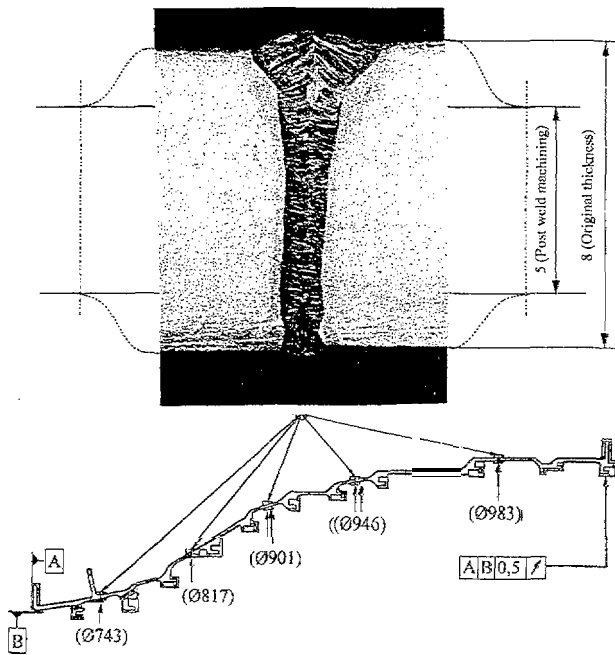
Cross section of assembled rings and circumferential weld to be made in low pressure turbine housing. The joint fit up is designed for post weld machining of the head and the root of the bead from 8 to 5 mm thick. Top: macro of the weld made by AVCO CO₂ laser at 12 kW and speed of 3.2 m/min.
